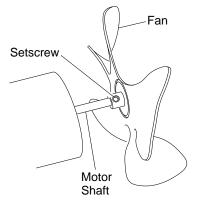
Fan, Motor Shaft, and Setscrew Location
